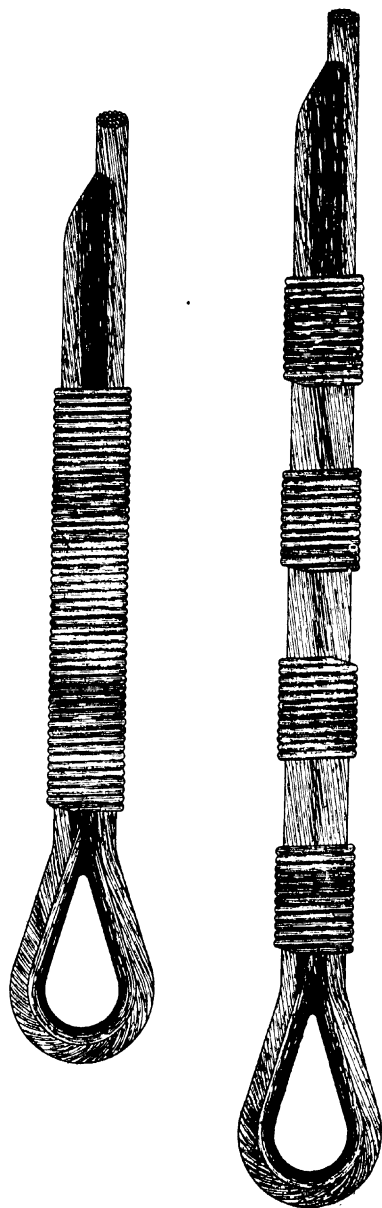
STANDARD AIRCRAFT CABLE JOINTS (COPPER WIRE BOUND AND SOLDERED ALL ALONG).
